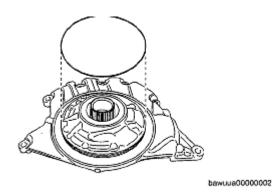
Identifying O-Ring Of Oil Pump Component Courtesy of MAZDA MOTORS CORP.
